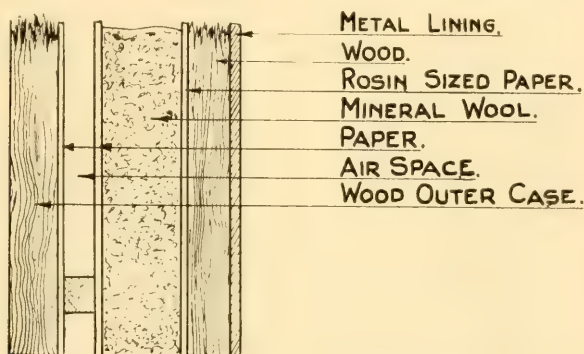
TYPICAL REFRIGERATOR WALL CONSTRUCTION
